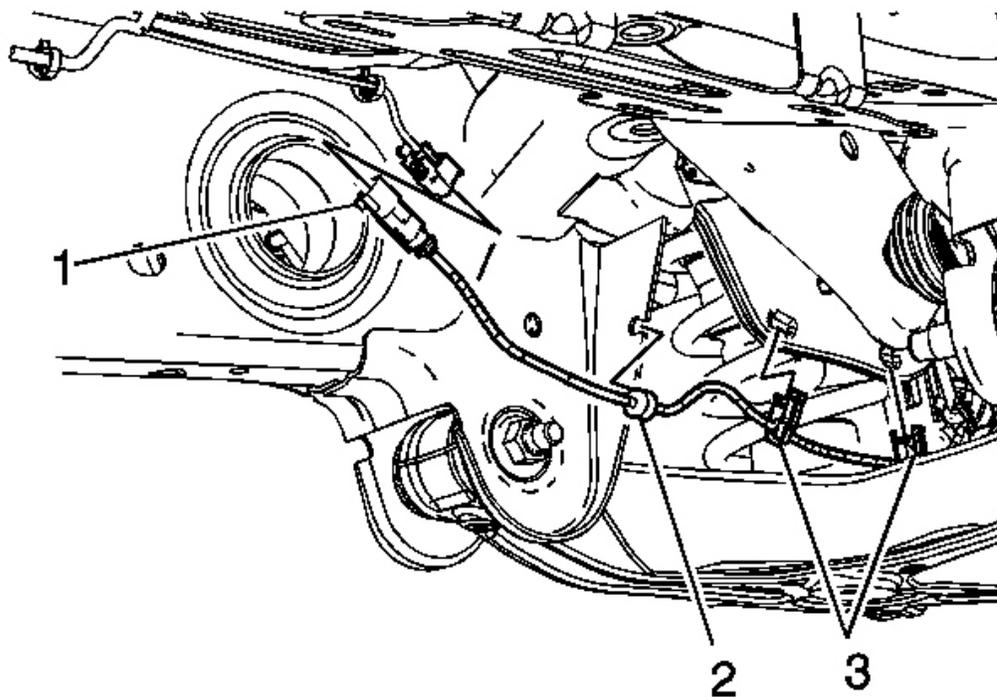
Identifying Wheel Speed Sensor Electrical Connector
